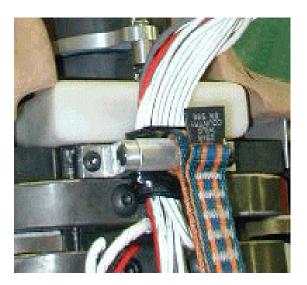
Head/Neck wire bundle secured with spine wire cover
